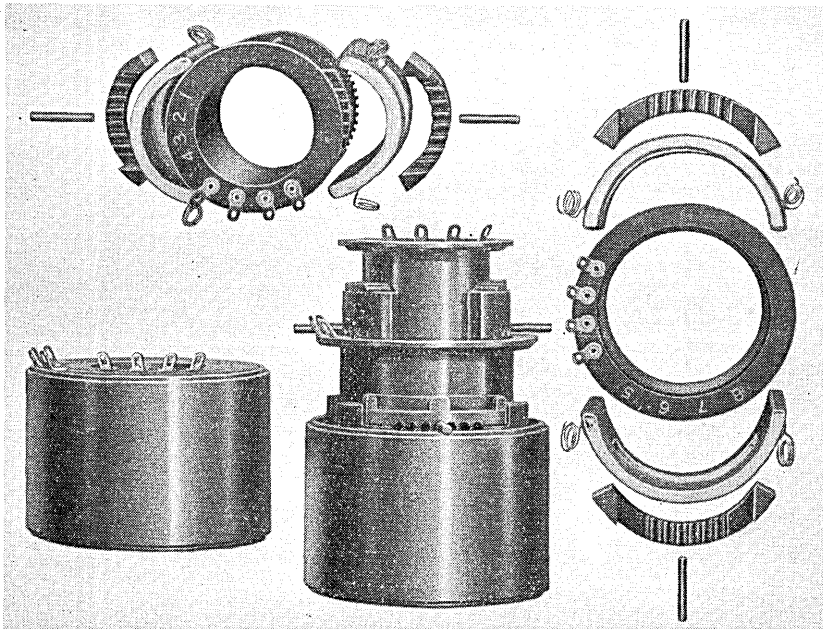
Constructional details—deflection coil design for AN/APQ-7 radar bombing equipment.
